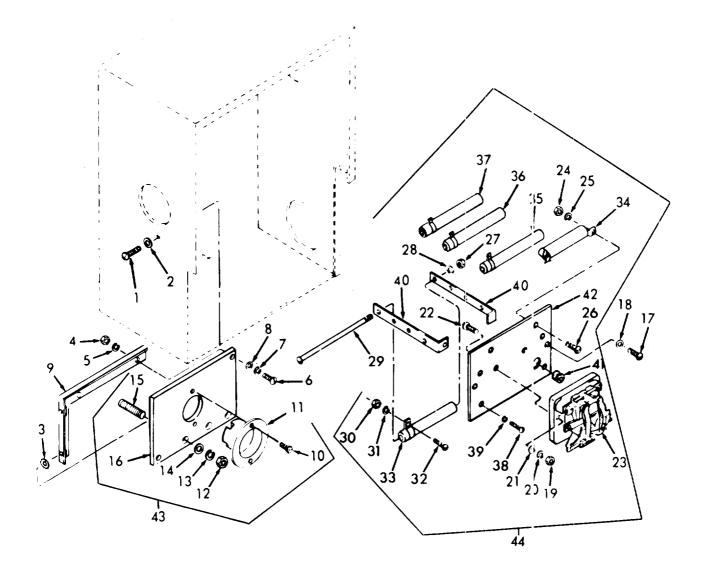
Resistor and Relay Mounting Panel, and Emergency Power Panel.
